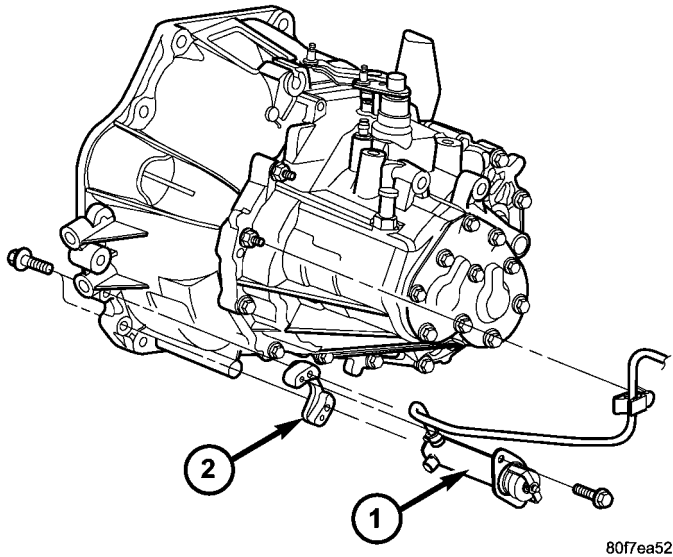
Clutch Slave Cylinder at Transaxle—2.0L Models
